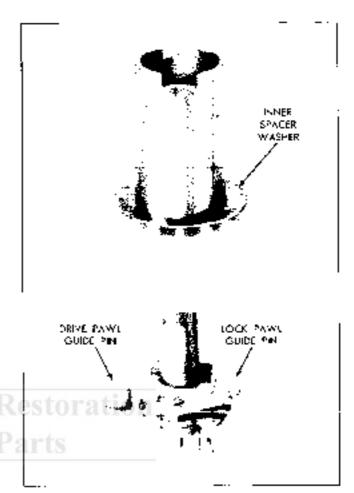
Installing Gear and Drive Shaft-Fortisc
